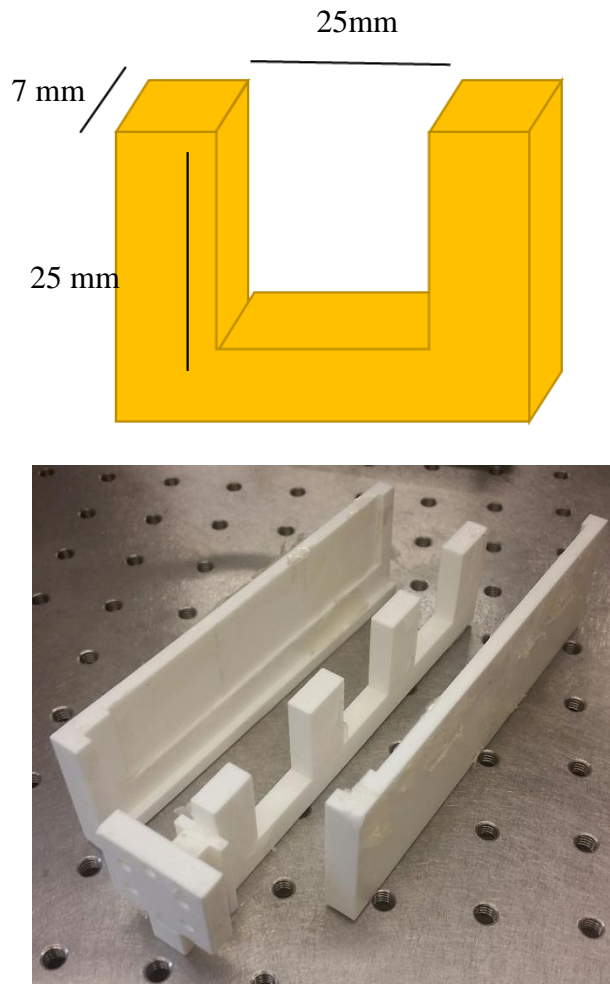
Schematic showing dimensions of mold geometry (top) and an image of the actual mold (bottom).
